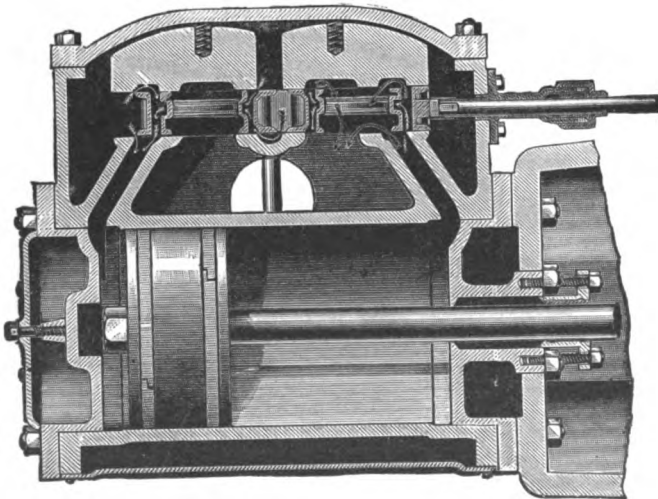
Watertown Engine. Section through Valve and Cylinder.
